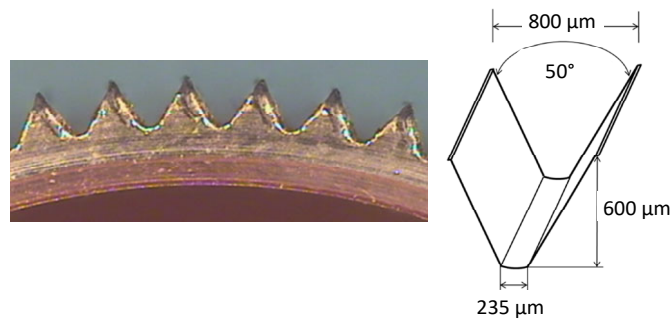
Micro-structured tube: left) Cross-section of V-grooved surface, right) Geometric dimensions.
